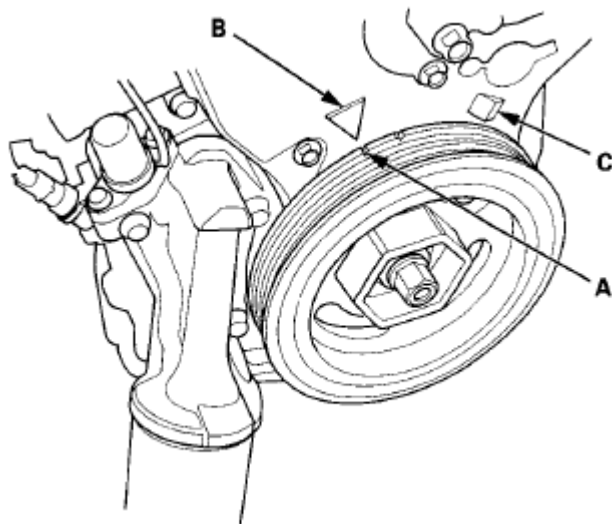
Identifying White Mark And Pointers On Crankshaft Pulley
